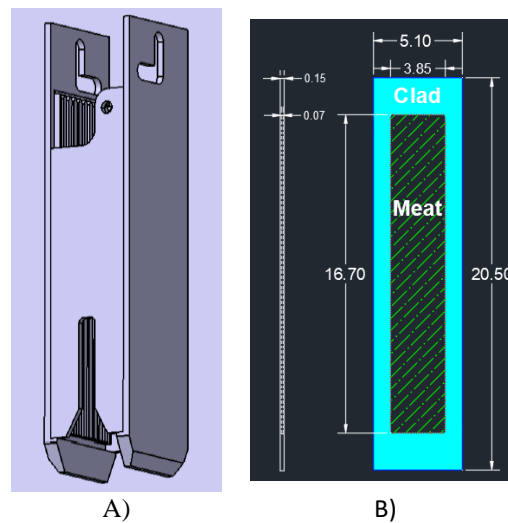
A) Mini-Plat holder drawing B) LEU Mini-Plat (dimensions in cm)
